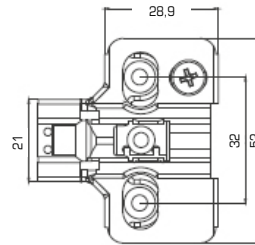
PLATES WITH EURO SCREWS WITH CAM ADJUSTMENT
